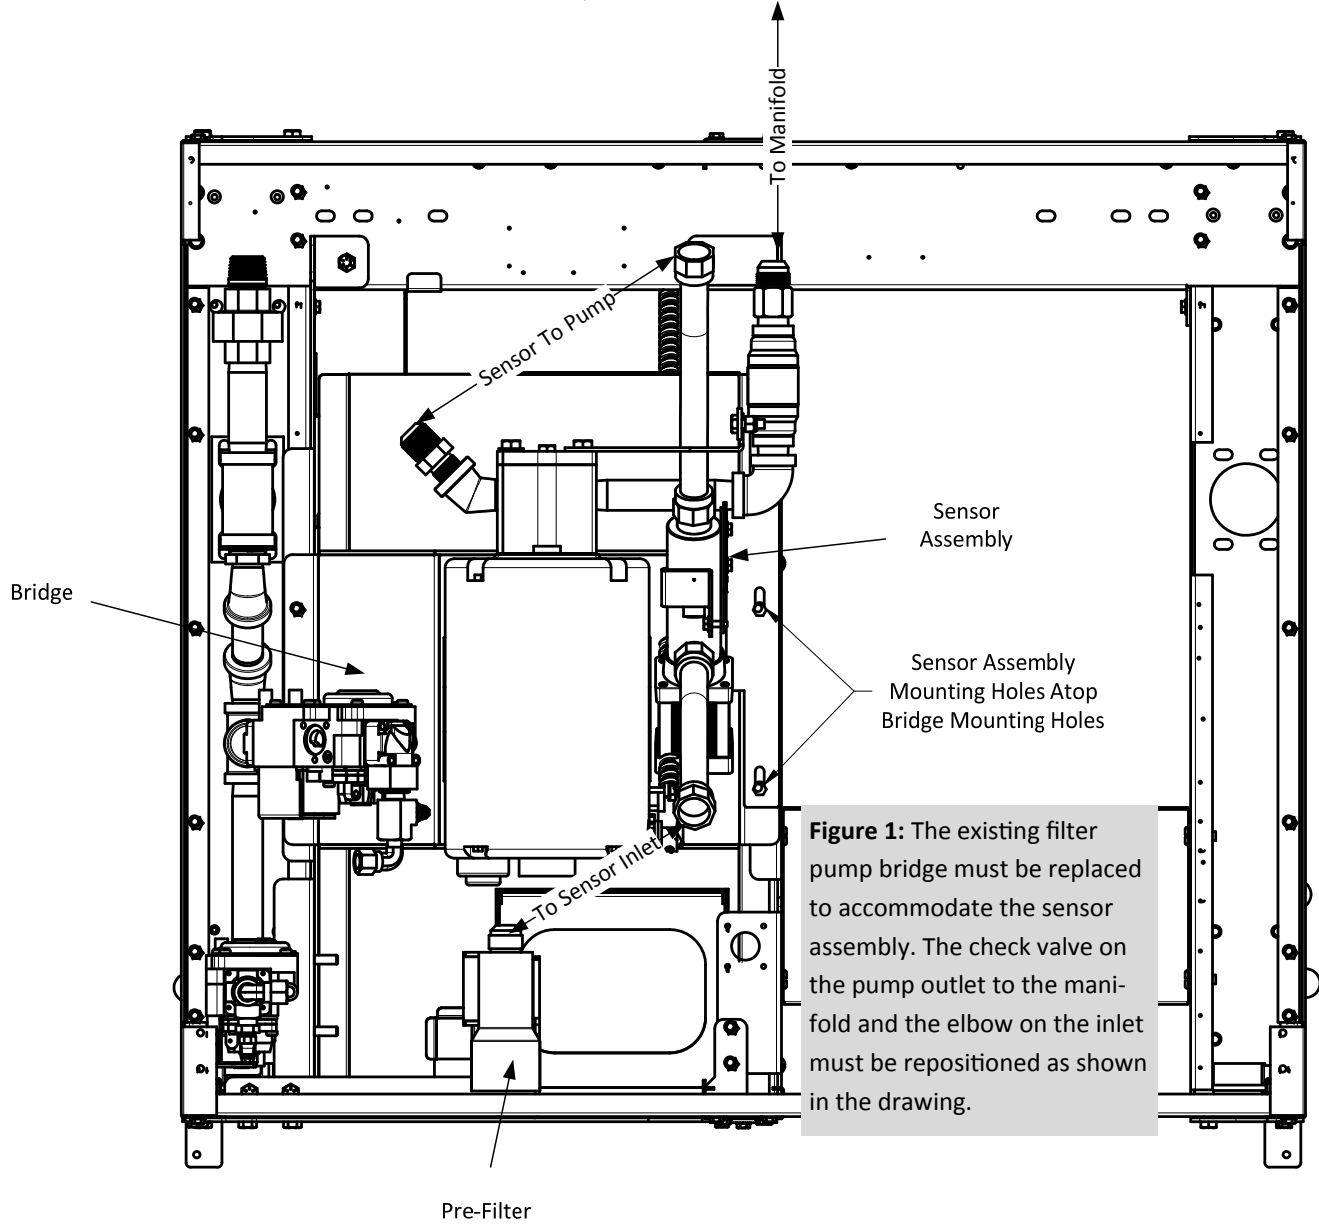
The existing filter pump bridge must be replaced to accommodate the sensor assembly. The check valve on the pump outlet to the manifold and the elbow on the inlet must be repositioned as shown in the drawing.
